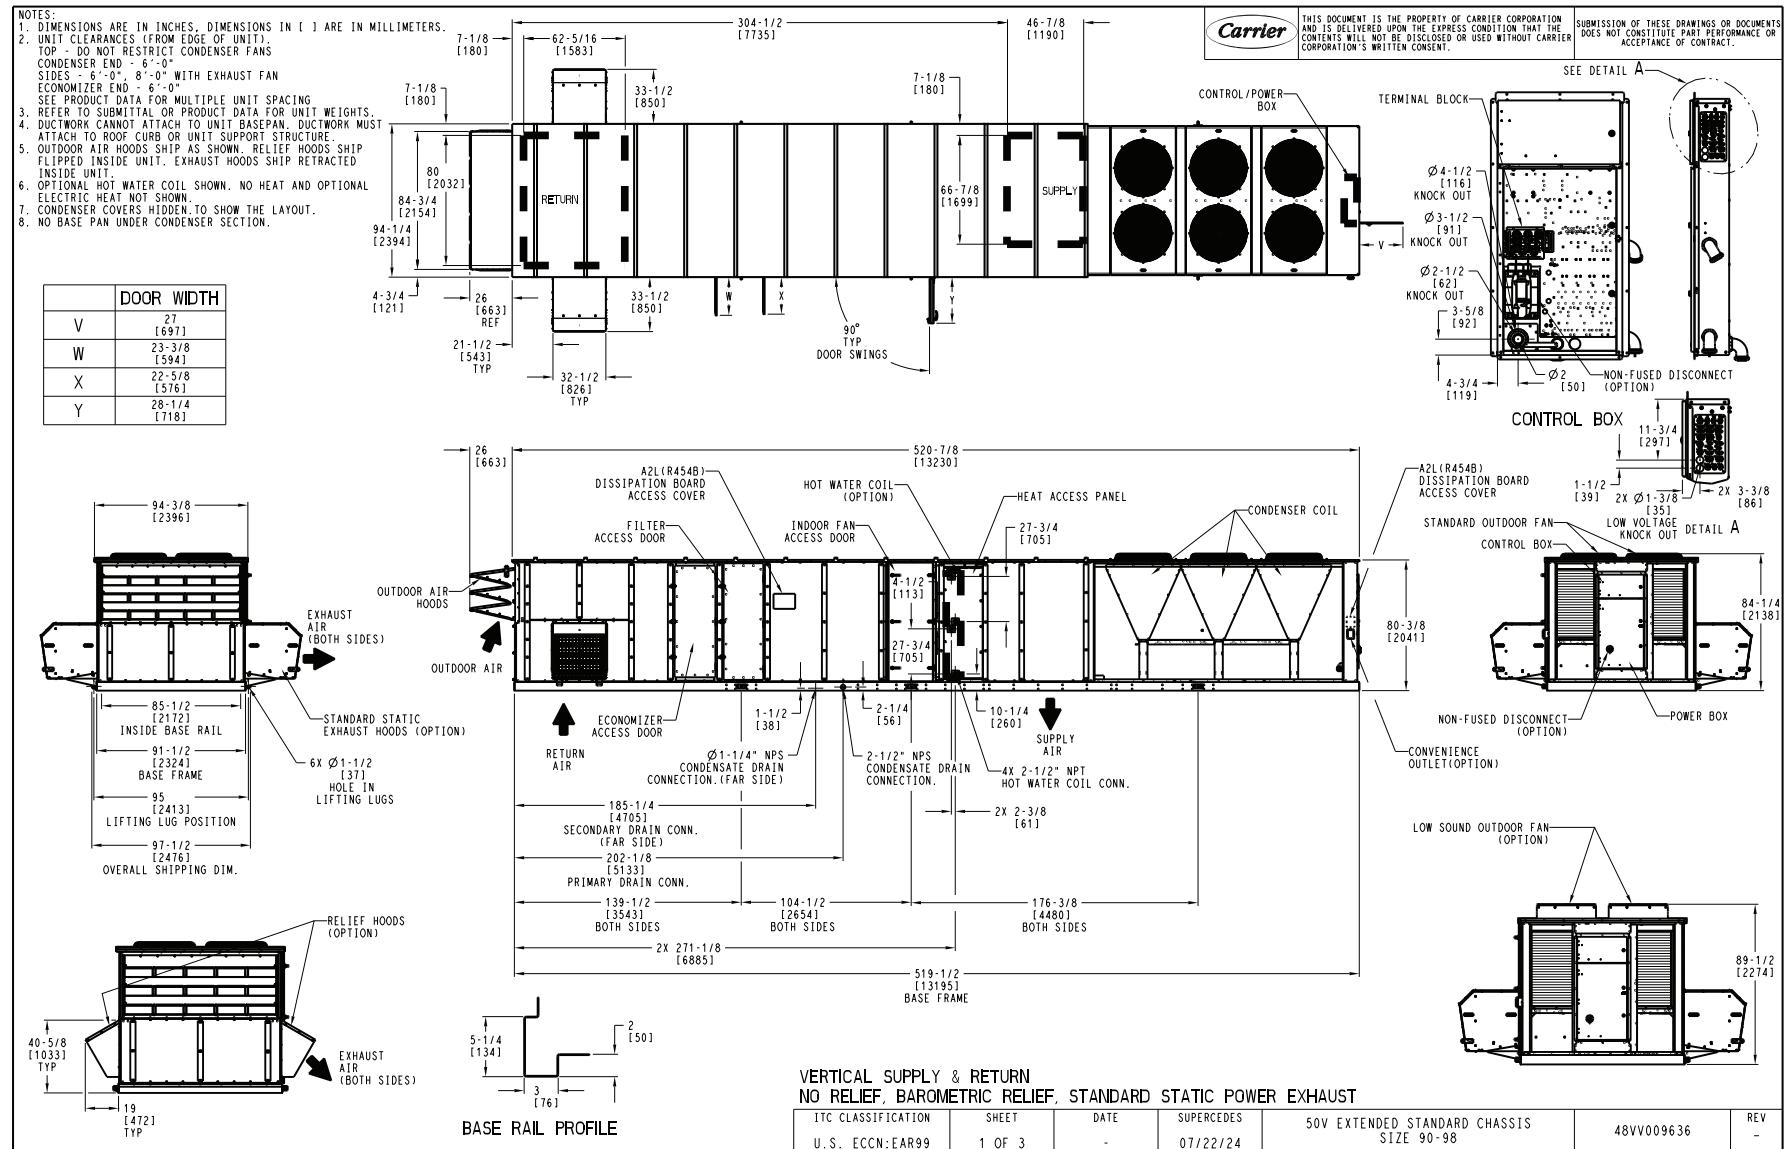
50V 90-100 Ton Extended Standard Chassis
